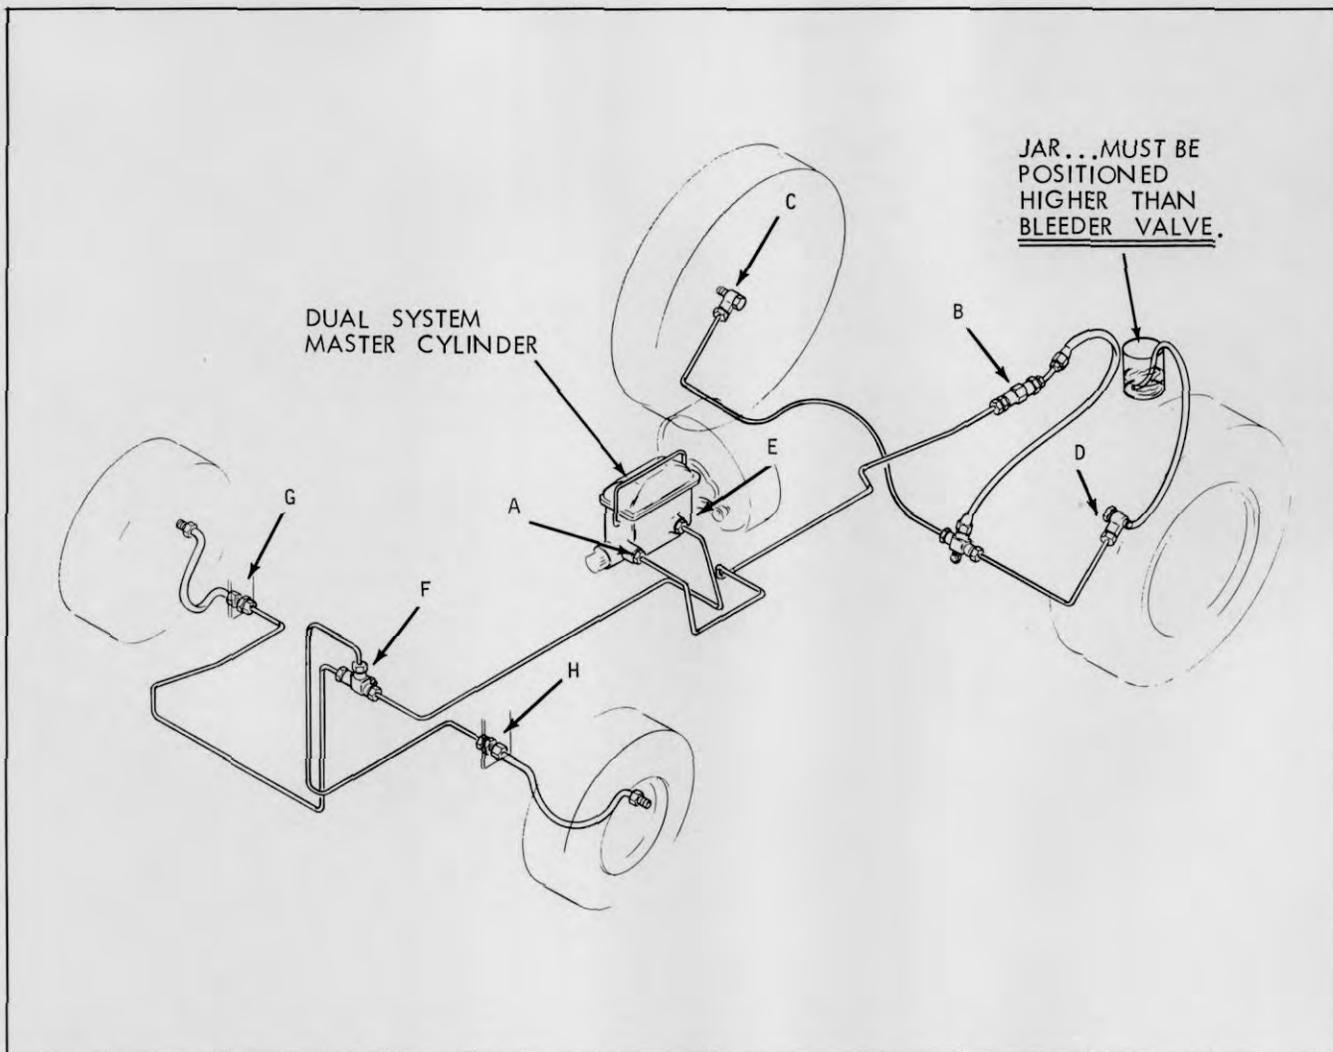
Typical Dual System Brake Lines - CTA-Perkins Diesel
